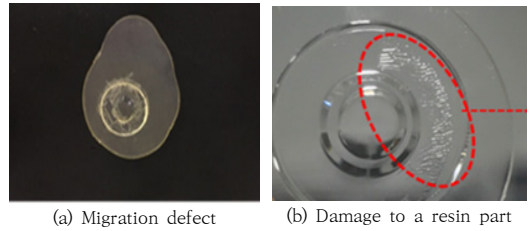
Defects in the surface of a molded part that occurs when there is no coating in the use of brass molds.
